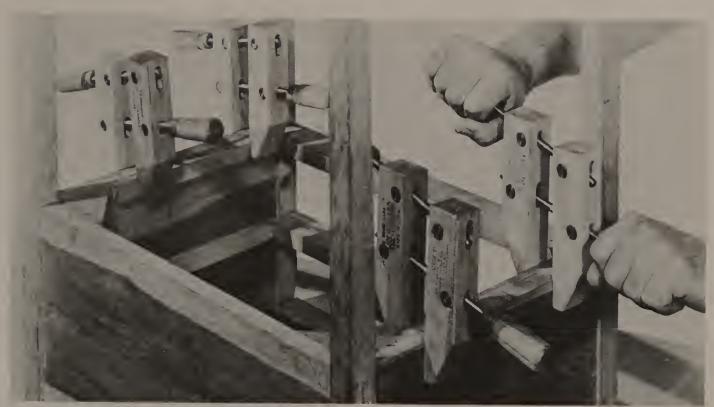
The hand-screw clamp is ideal for small jobs.
